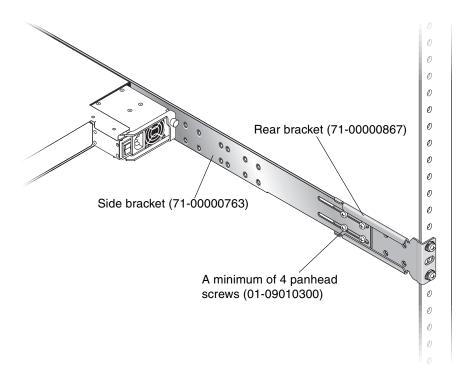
Example of Rear and Side Brackets Assembled
